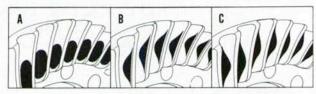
Views of bevel ring gear tooth contact patterns. A. Desired tooth
